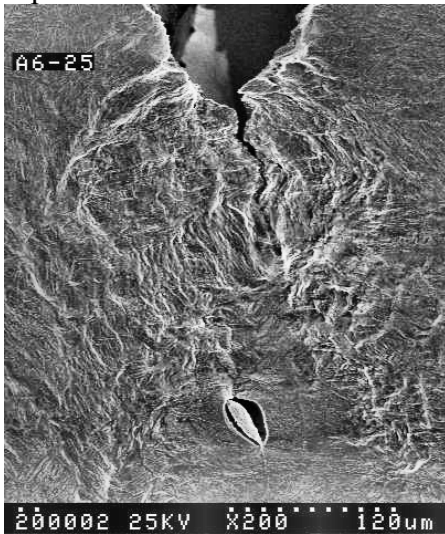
Damage and failure of overmatched specimen with a sandwich layer width of 3.1mm
